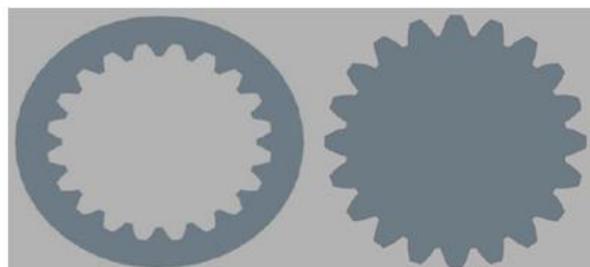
Sketch of Spline Shaft and Mating Shaft
